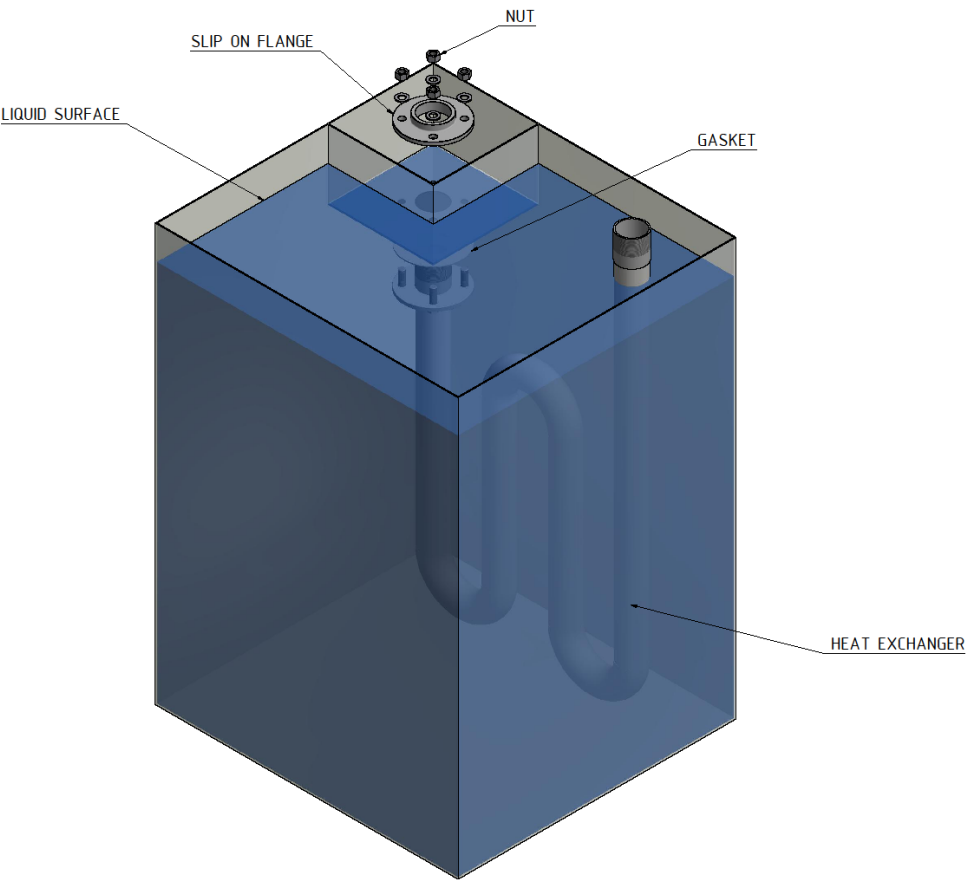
FLANGE AND PLATE MOUNTED HEAT EXCHANGERS
